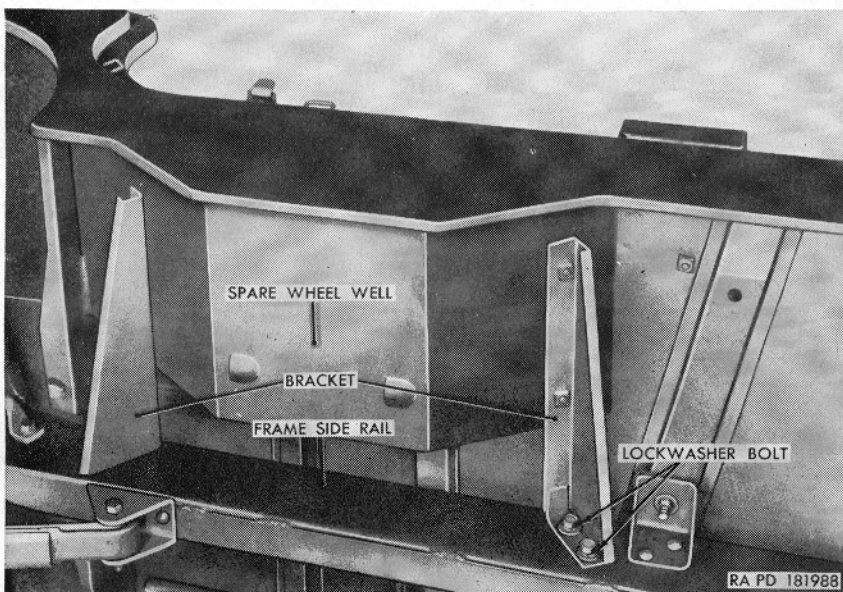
(Added) Spare wheel well-to-frame side rail brackets M170.
